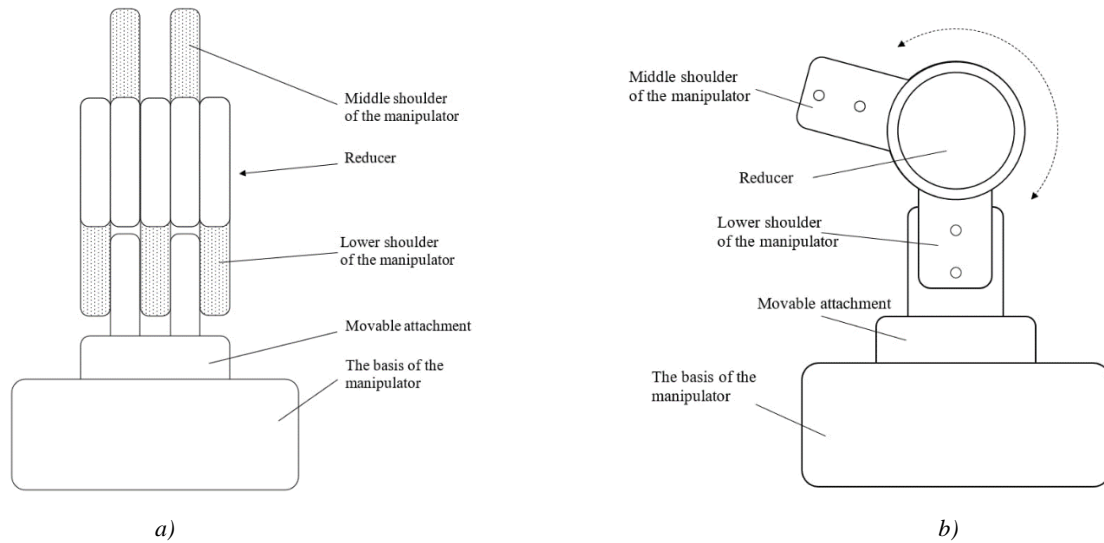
Drawing of the moving part of the manipulator structure: a - front view; b - side view
